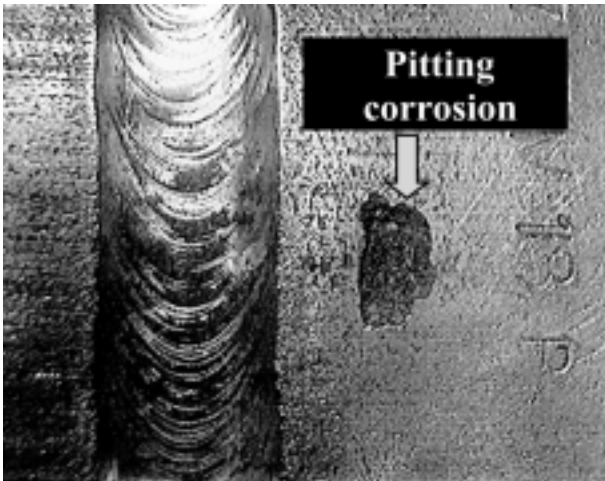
Pitting corrosion at the low temperature heat affected zone (LTHAZ).
